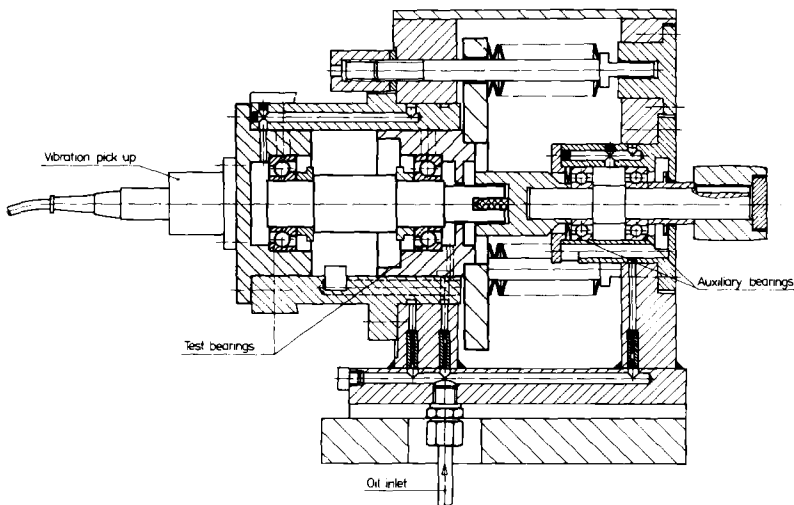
New FAG fatigue test rig for angular contact ball bearings.
